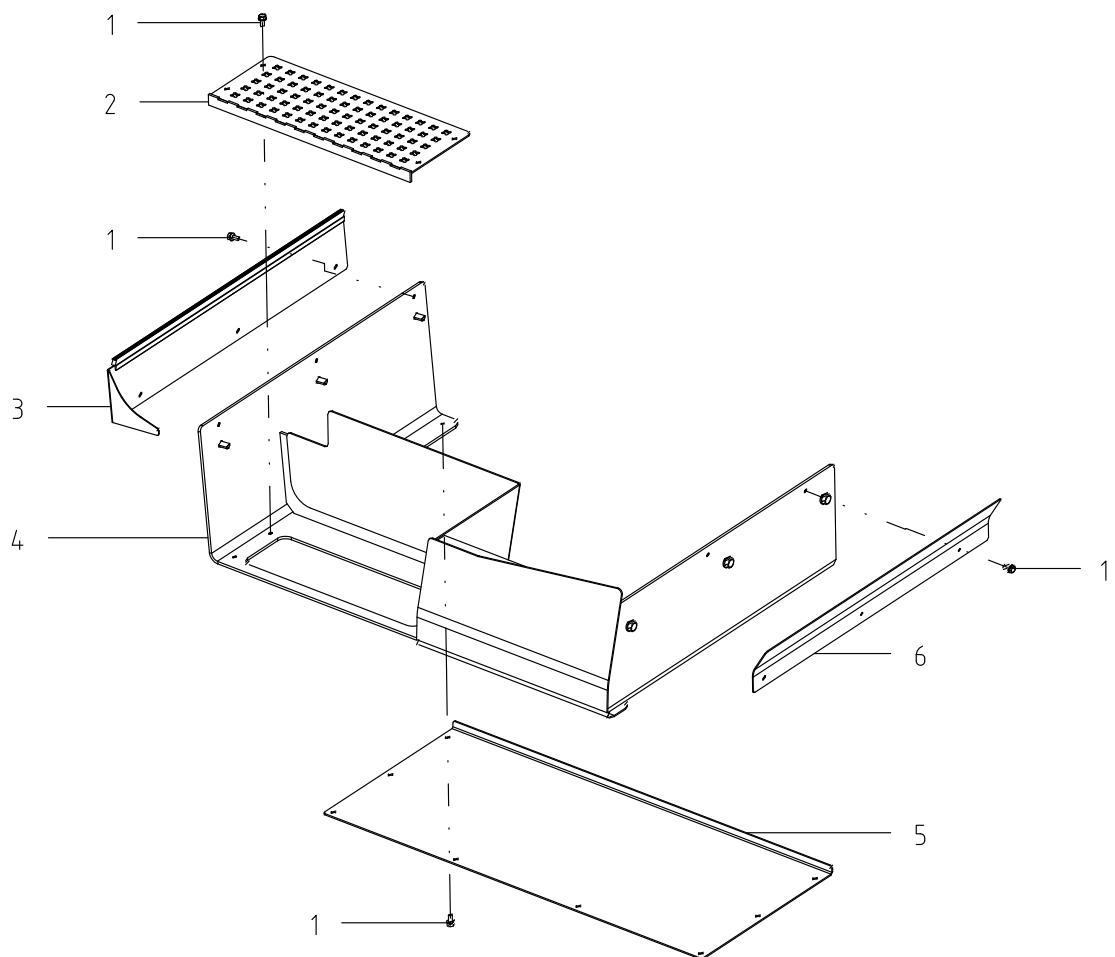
Driver's cab lower cover assembly (T35-100XHYG)
